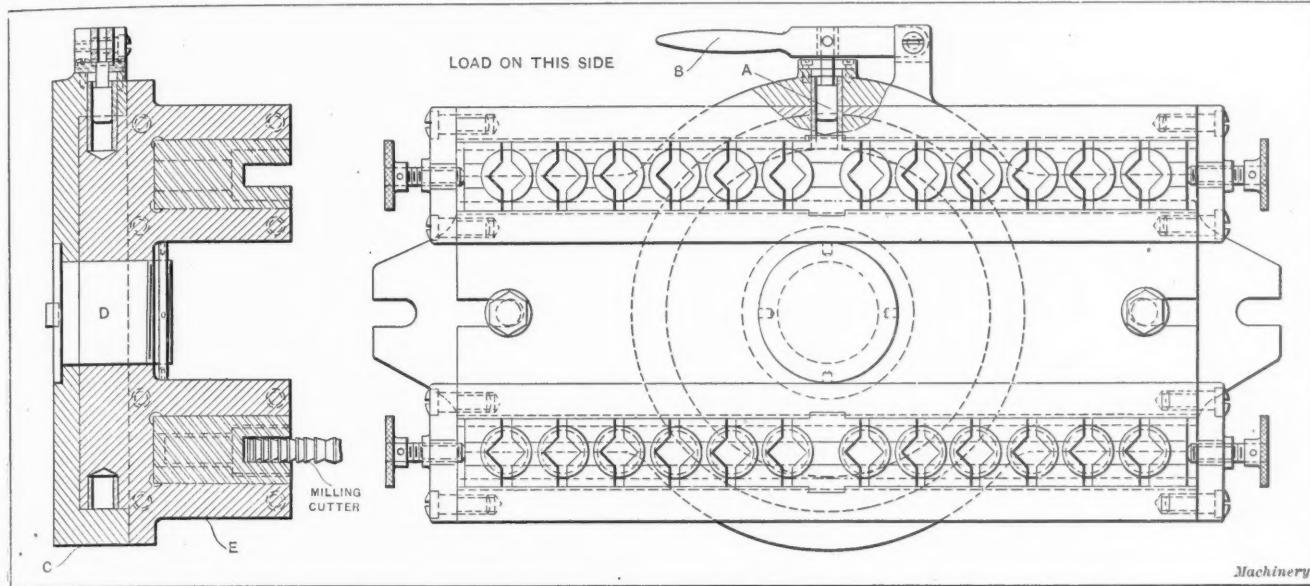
Milling Fixture which proved Unsuccessful for milling the Slot in the Push Rod shown in Fig. 1
